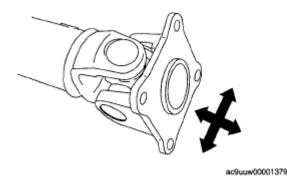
Inspecting Play And Rotation Of Joint Courtesy of MAZDA MOTORS CORP.
